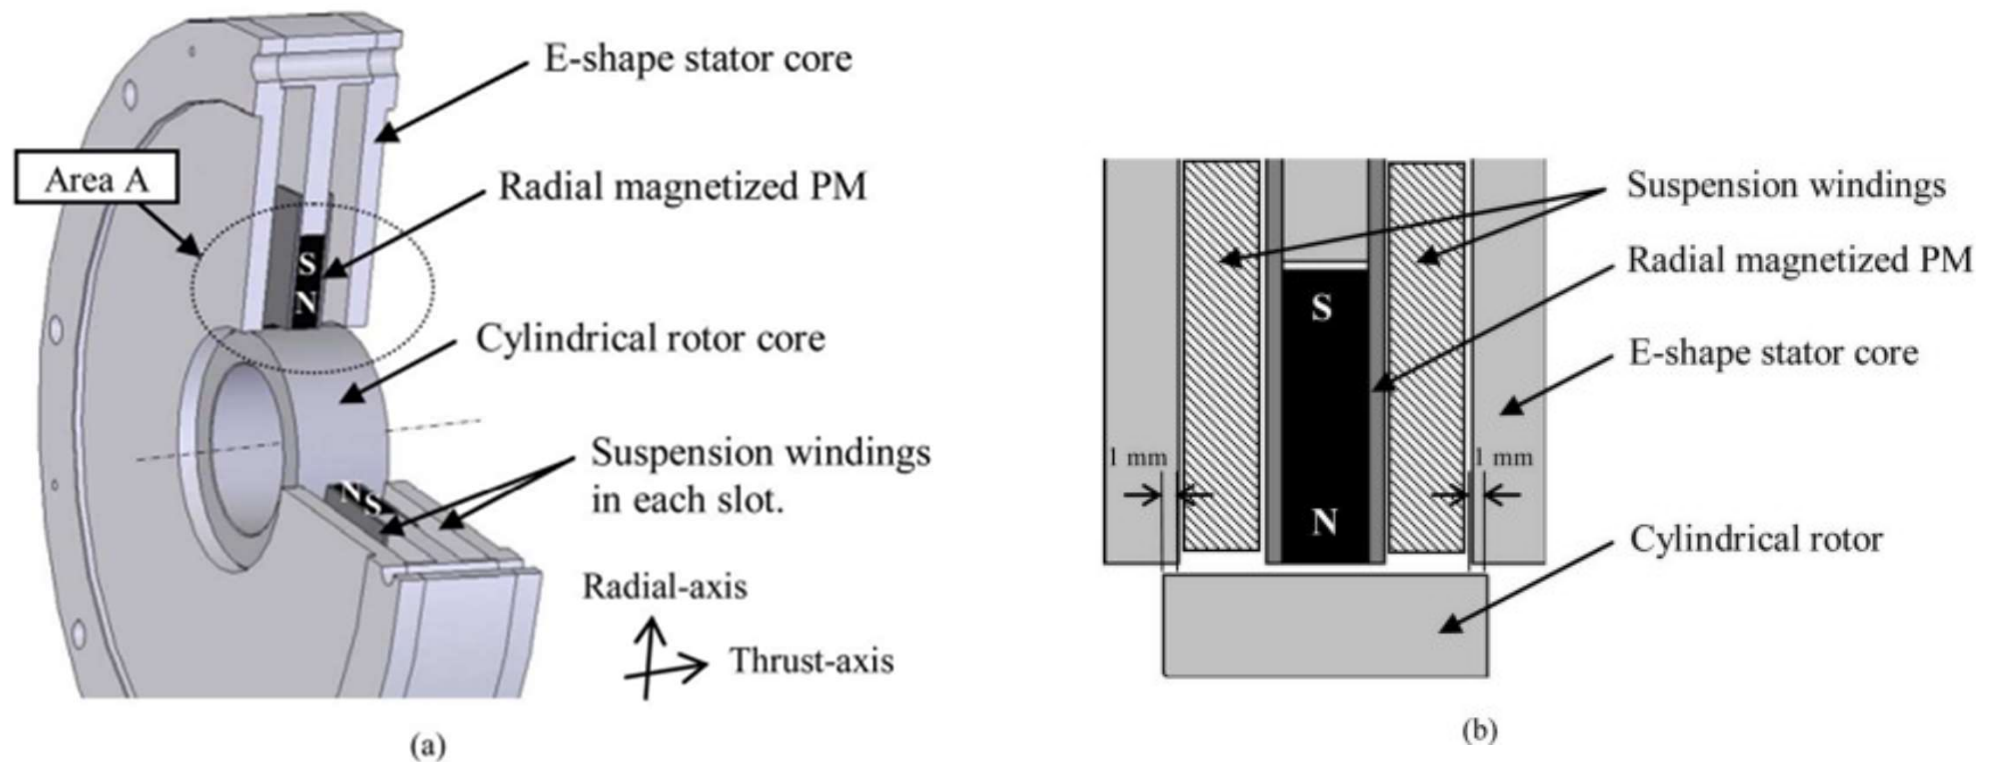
Structure of TMB equipped with cylindrical rotor core: (a) overall view; (b) detail view of Area A.
